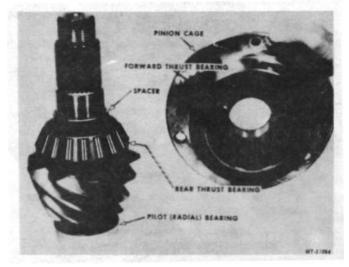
Pinion Separated From Cage CLEANING, INSPECTION AND REPAIR
